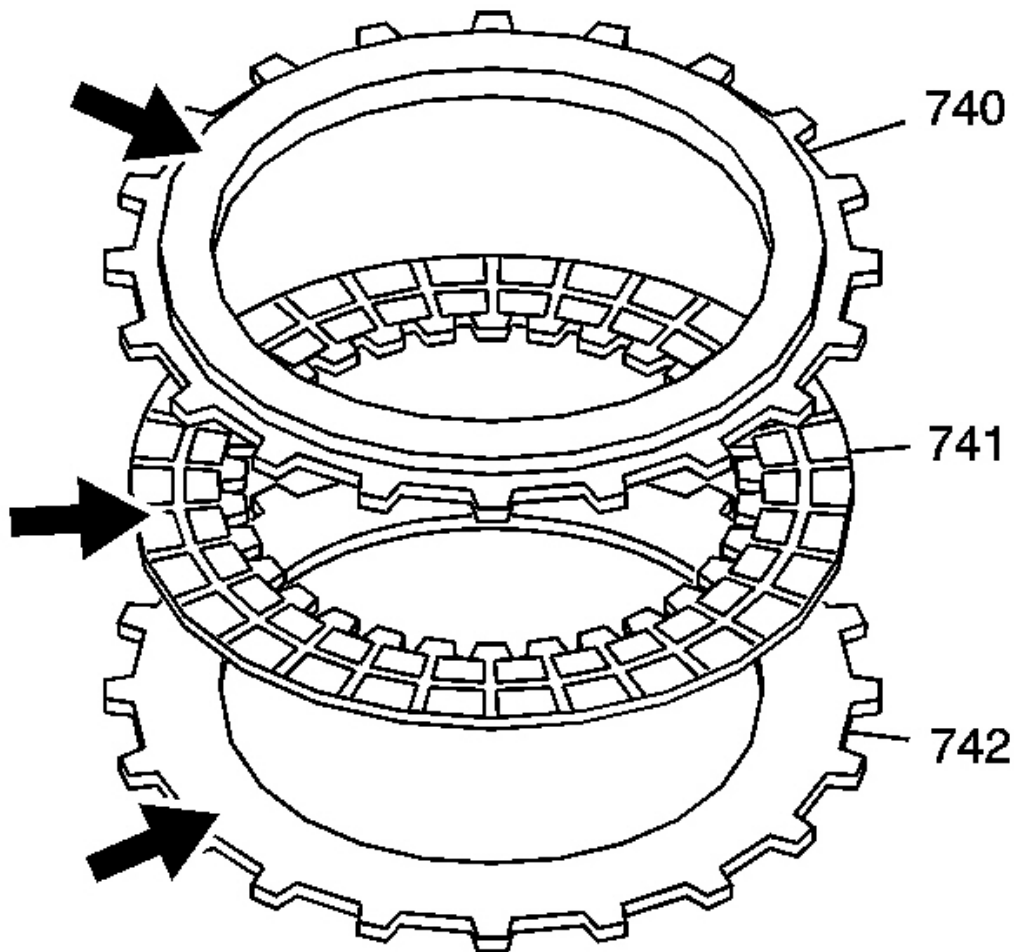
Inspecting 2nd Clutch Steel Plates, Fiber Plates & Selective Backing Plate For Damage
